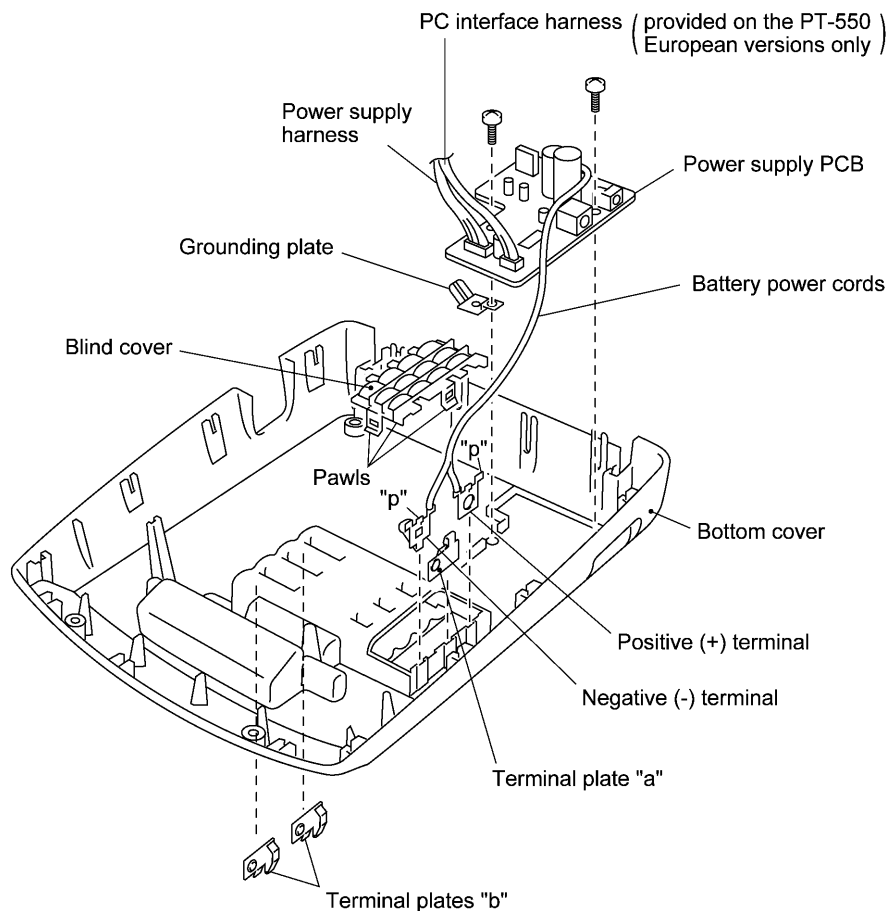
Removing the Blind Cover, Power Supply PCB, and Terminal Plates
